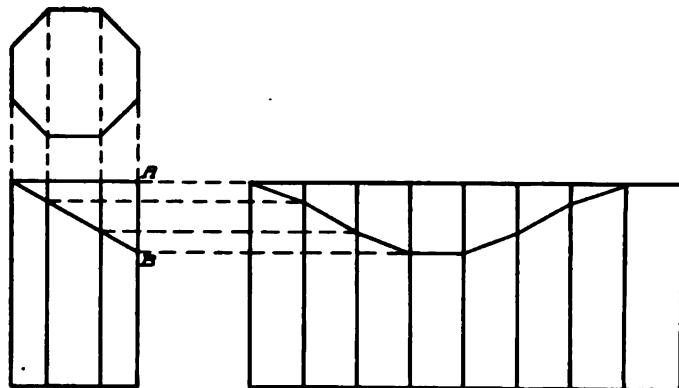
Plan, Elevation, and Development of an Octagonal Prism
